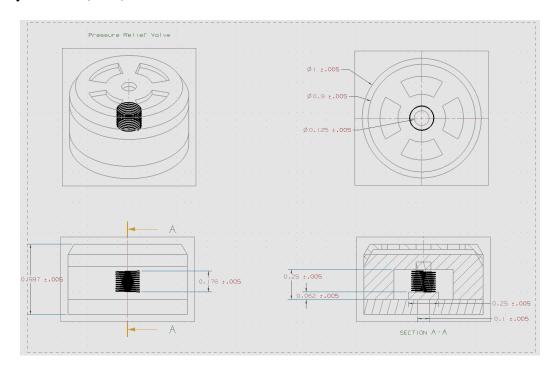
Technical Drawing of Pressure Relief and Notification Mechanism
